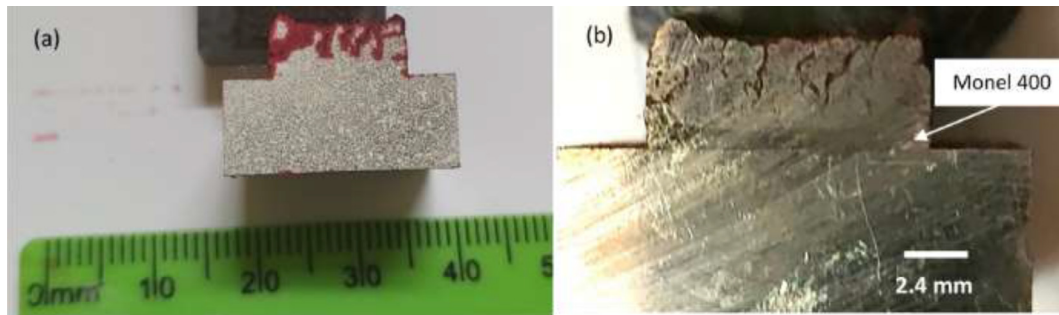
Ni-alloy butter; (a) dye penetrant sample, (b) macro-image showing cracks.
